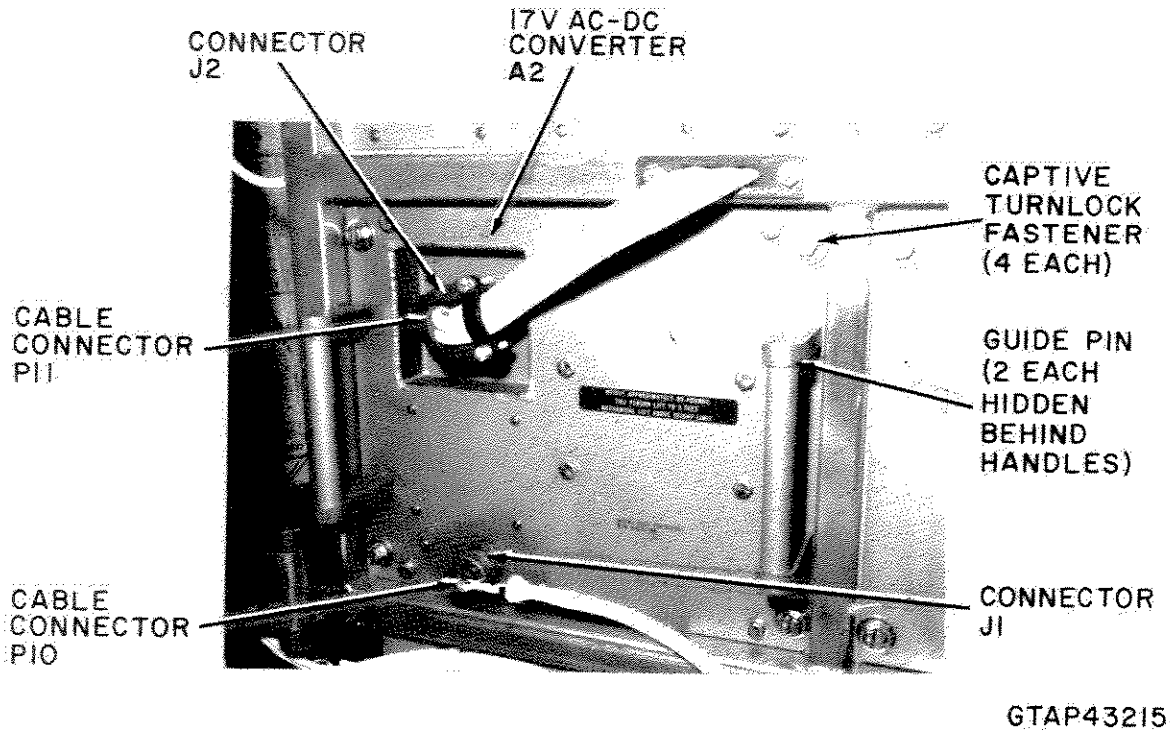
Transmit Beamformer Cabinet, Unit 150, 17 V Ac-to-Dc Converter A2
